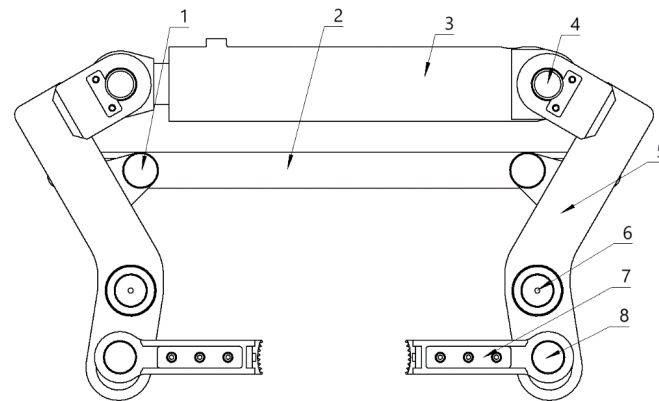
Schematic diagram of clamping mechanism.1.Limit plate connecting shaft;2.Limit plate;3.Clamping cylinder;4.Cylinder connecting shaft;5.Clamping arm;6.clamp seat fixing shaft;7.Clamping clamp; 8.Sliding pin.
